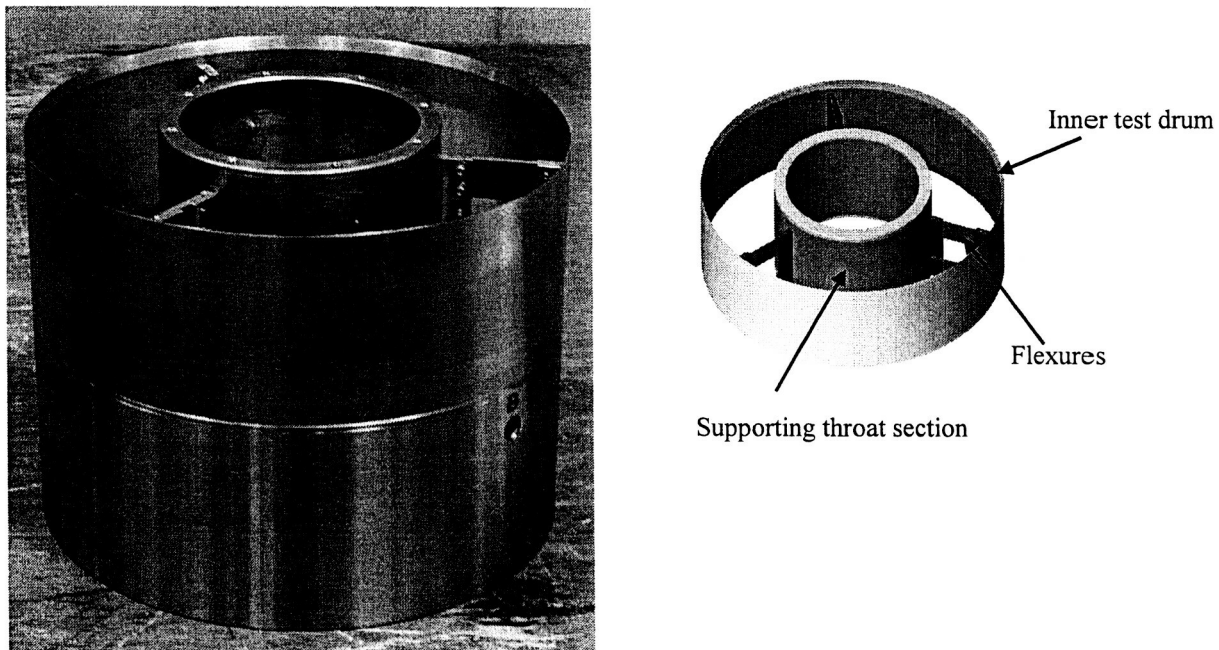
The picture and sketch show the inner test drum, 6 flexures with mounting brackets at 3 different circumferential locations, and the supporting throat section. The picture also shows the lower guard cylinder with the port marked “B” for the piezoelectric transducers. The variable reluctance displacement transducers are not shown.
